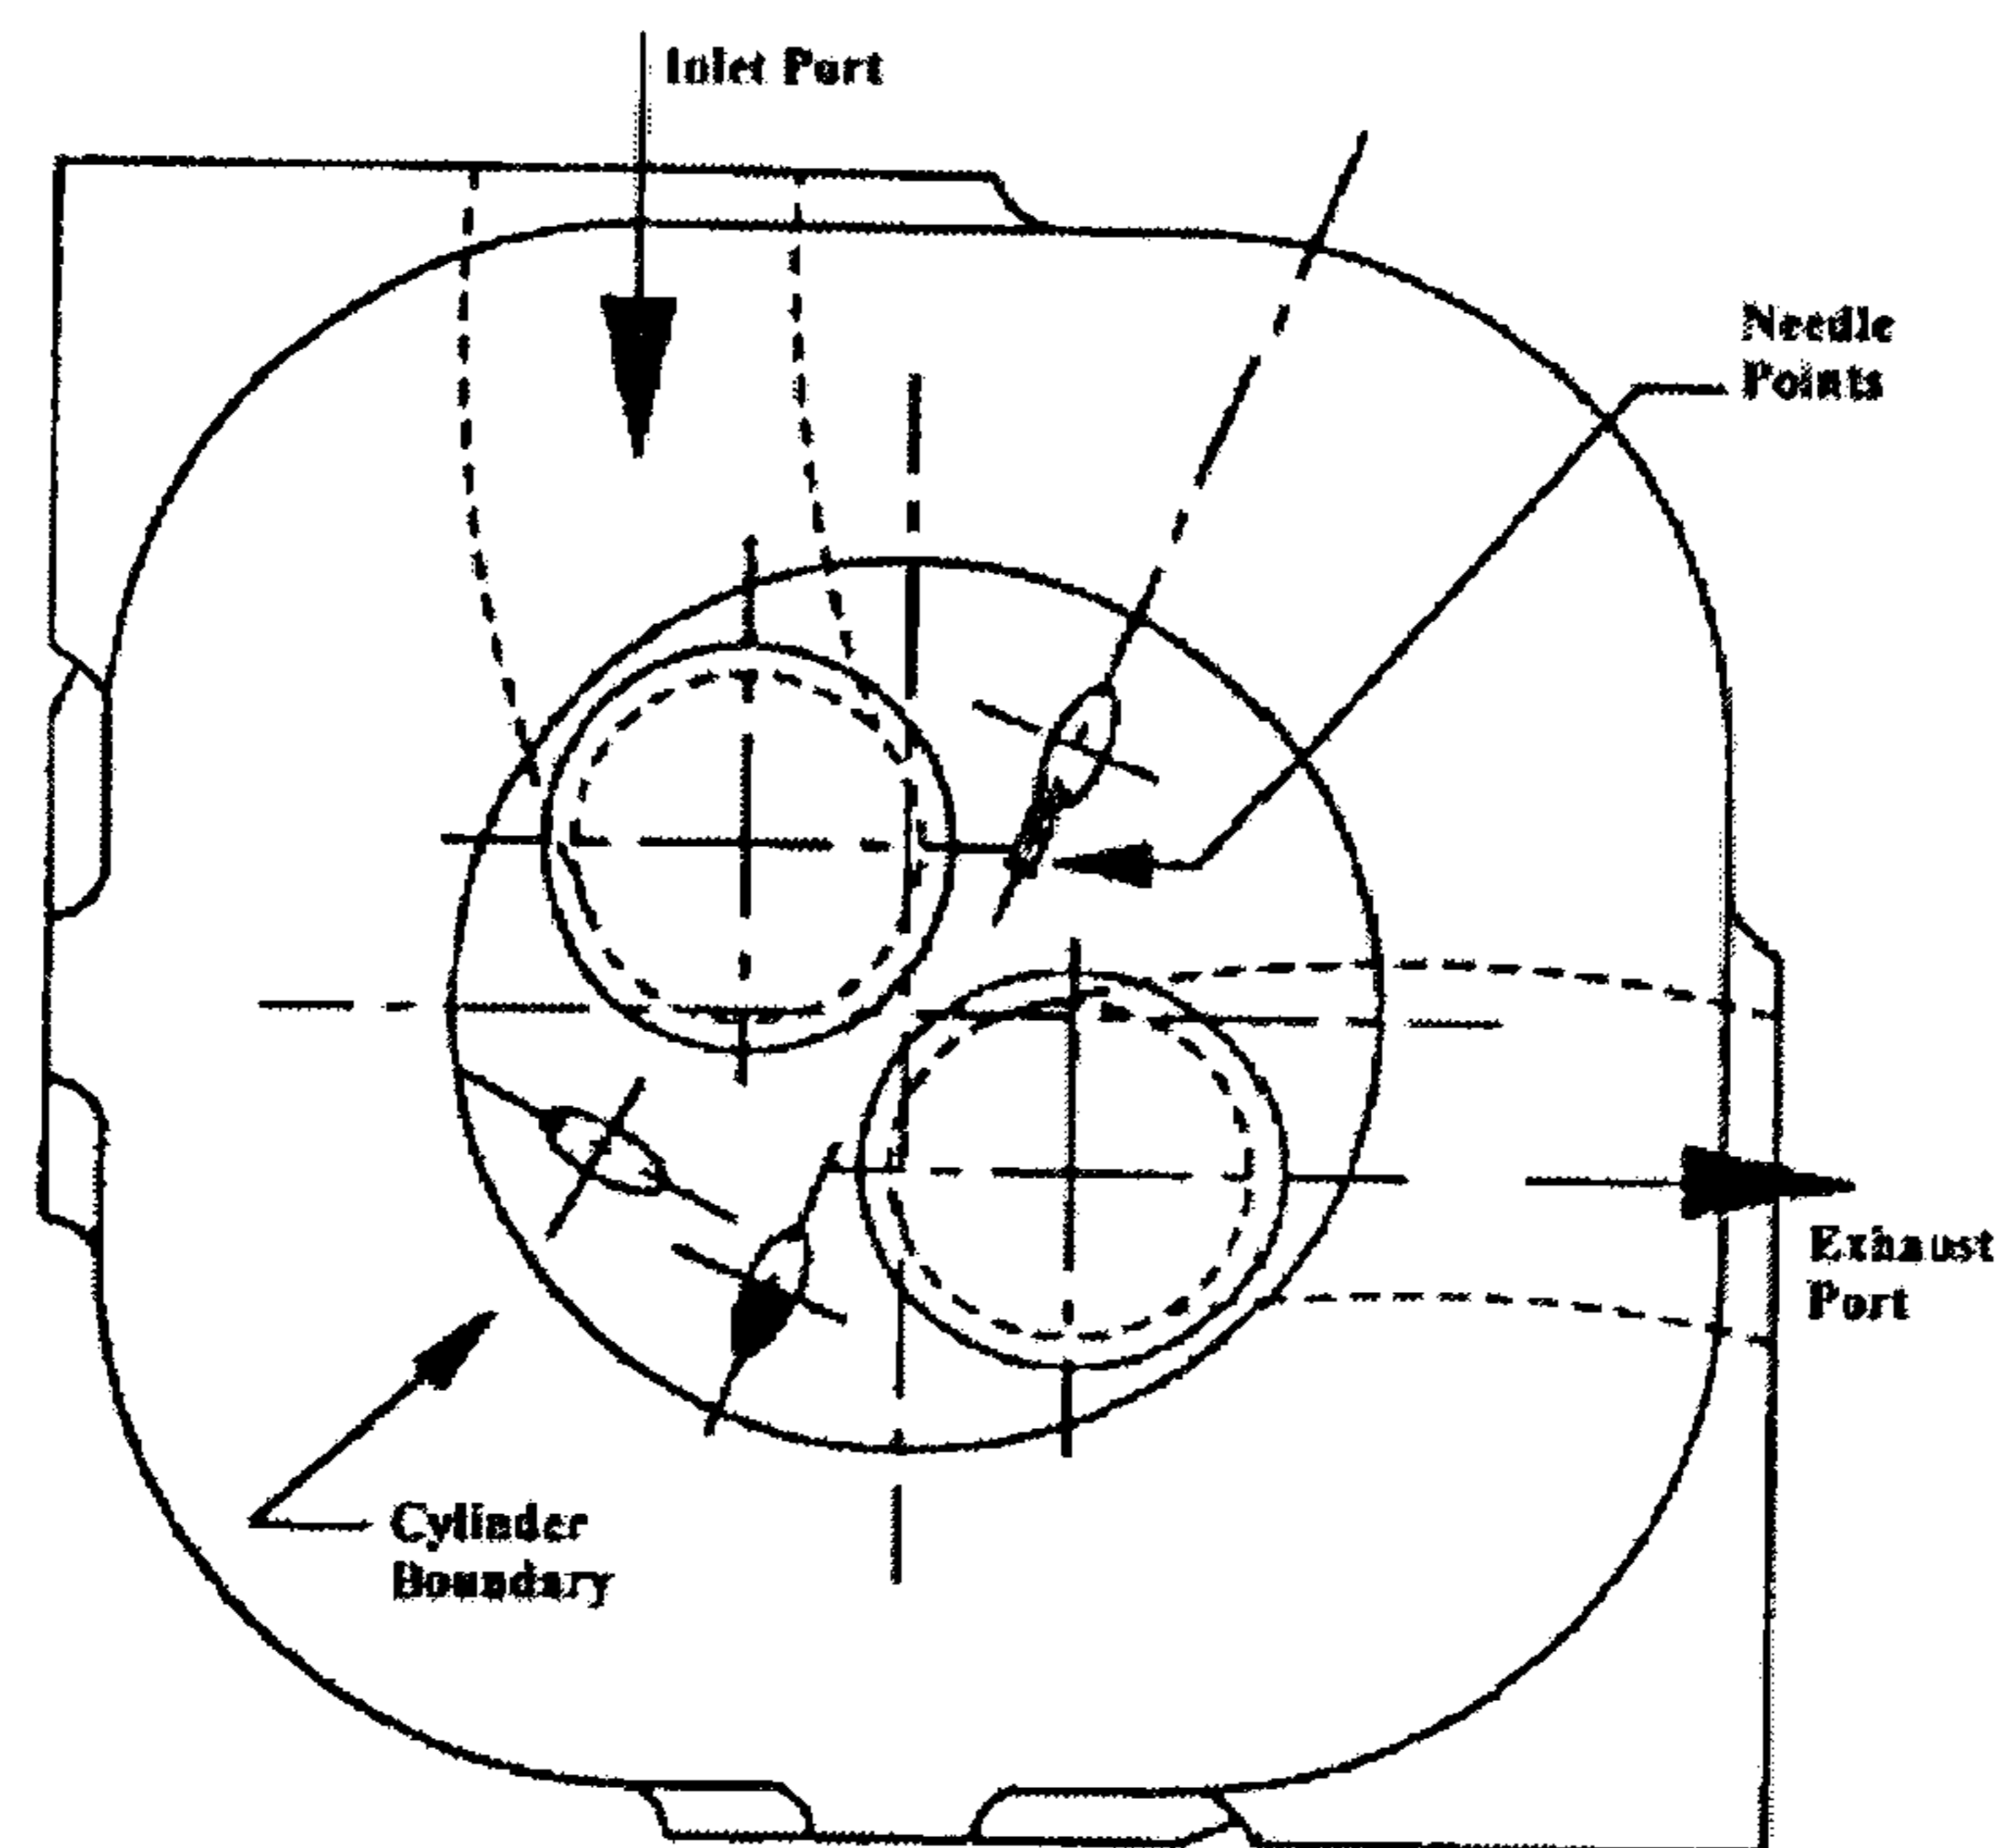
Ricardo E6 spark ignition/gasoline type cylinder head (bottom view) [Erdil, 2002]
